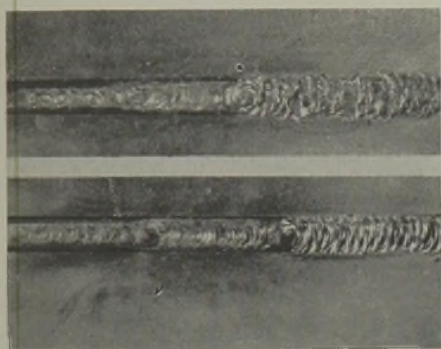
(top) Poor vertical weld—improper electrodes, welding technique. (bottom) Good vertical weld—proper electrode, current and electrode manufacture.
